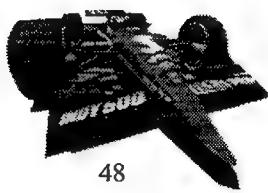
BILLBOARD UPPER ASSEMBLY
